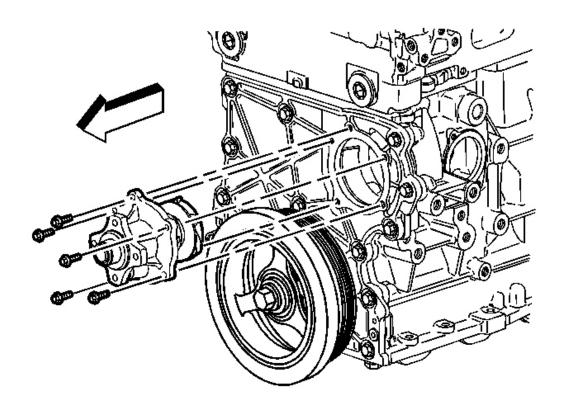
View Of Water Pump, Gasket & Bolts Courtesy of GENERAL MOTORS CORP.
